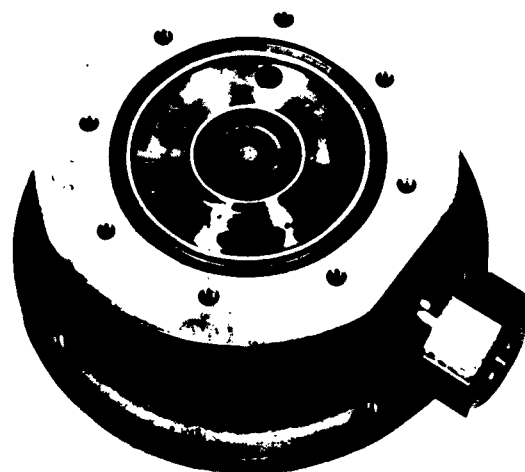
ACOUSTIC FILTER COMPONENTS & ASSEMBLY
